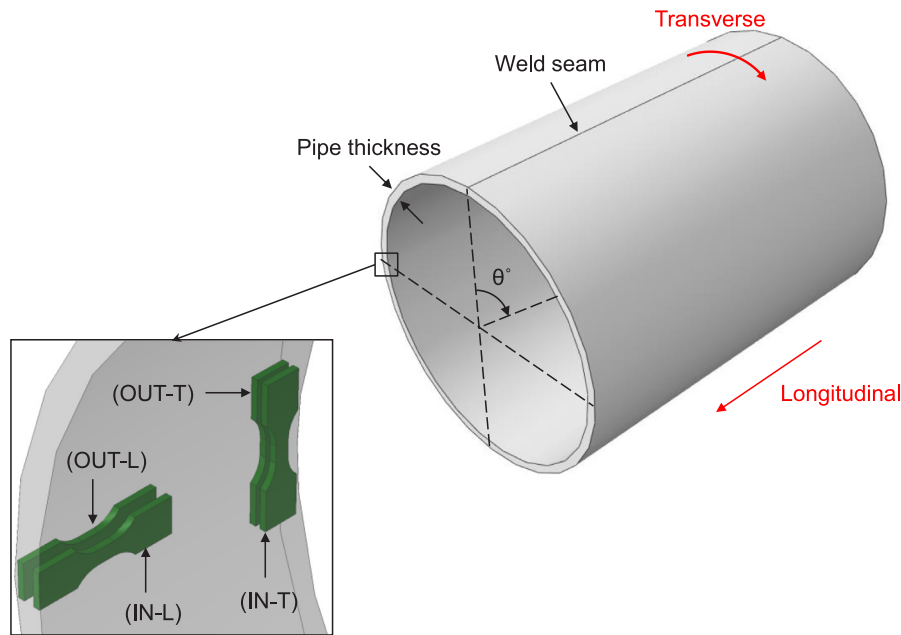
Location of the strip specimens extracted from the JCO-E pipe.
